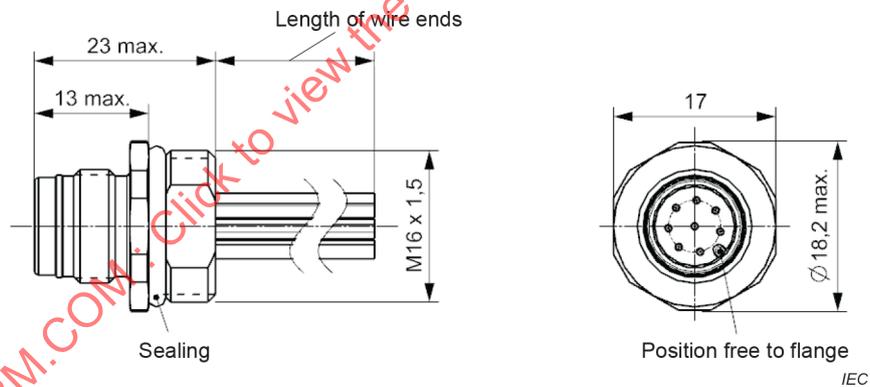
Fixed connector, male contacts, mounting with thread M12 × 1 and outer push-pull locking, with wire ends, single hole front mounting thread M16 × 1,5
